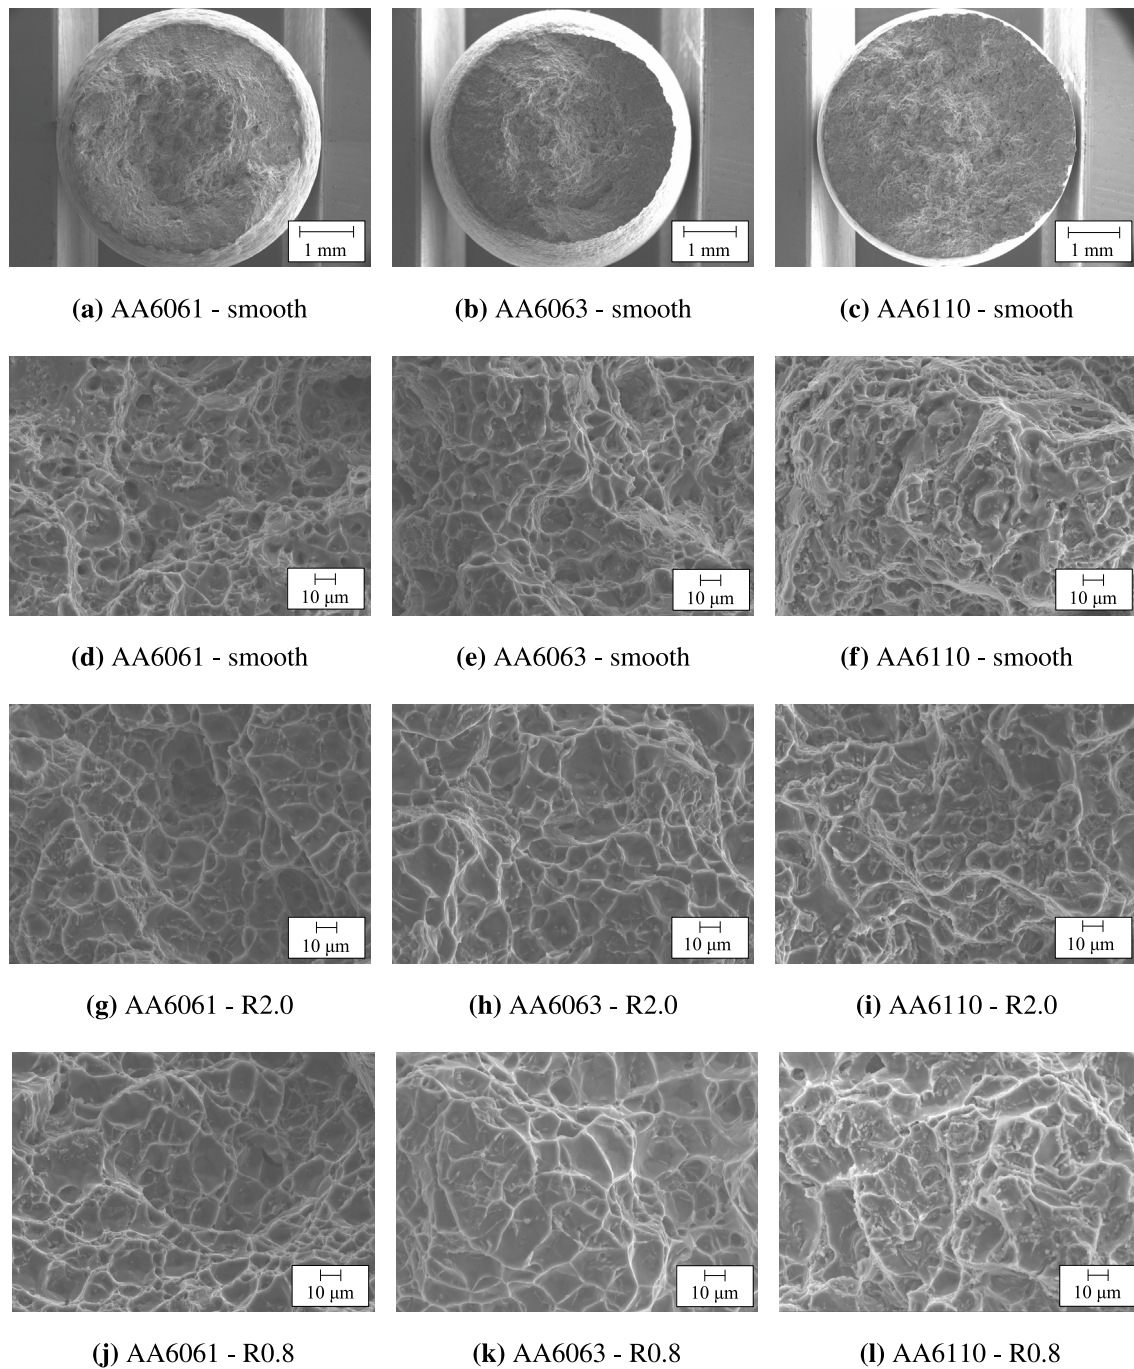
Fracture surfaces: (a)–(c) global images of the smooth specimens, and local images from the central part of (d)–(f) the smooth specimens, (g)–(i) the R2.0 specimens and (j)–(l) the R0.8 specimens.
